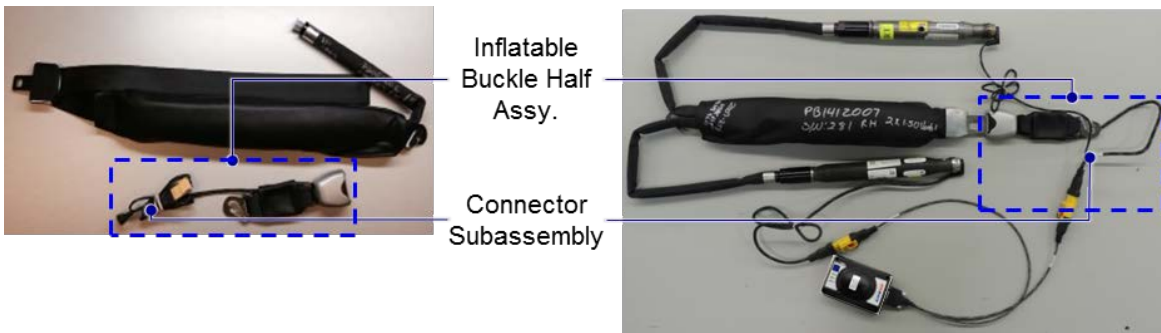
Inflatable Buckle Half Assemblies with Enabling Switches
